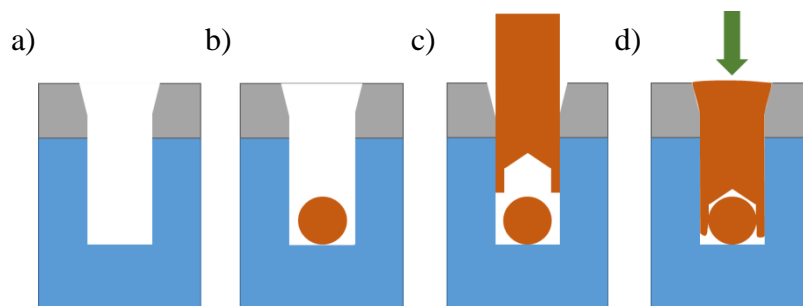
Cross section schematic representation of riveting into a blind hole: a) a hole is formed in the materials to be joined with a recess on the top; b) a steel ball is put into the hole; c) the rivet is put into the hole; c) rivet is forced downwards crushing the steel ball and making the rivet expand and lock in place
